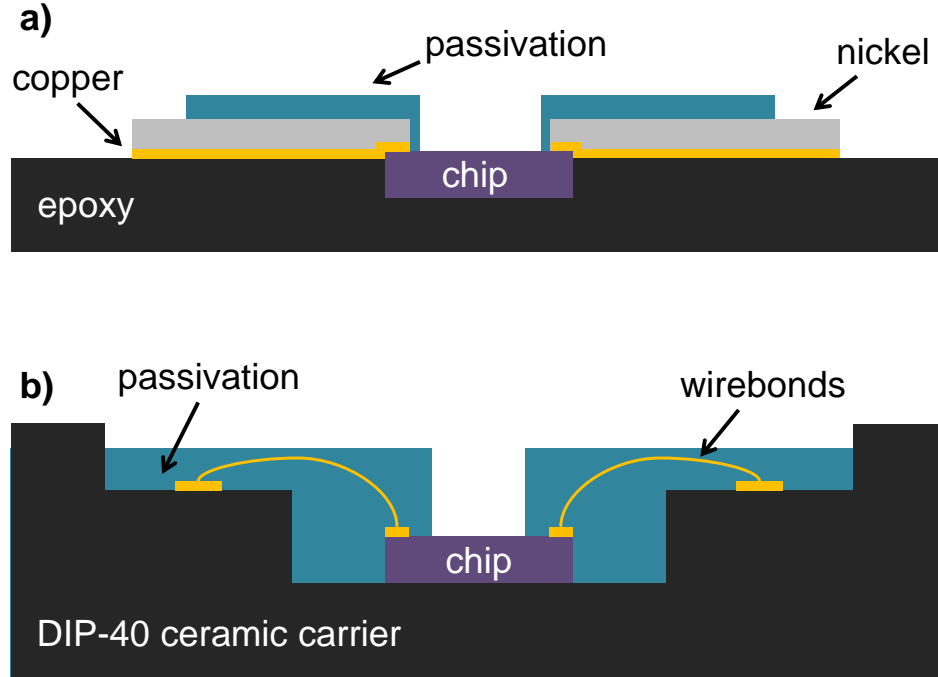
Cross-sectional views of chips packaged in a) an epoxy handle wafer, and b) a passivated DIP carrier
